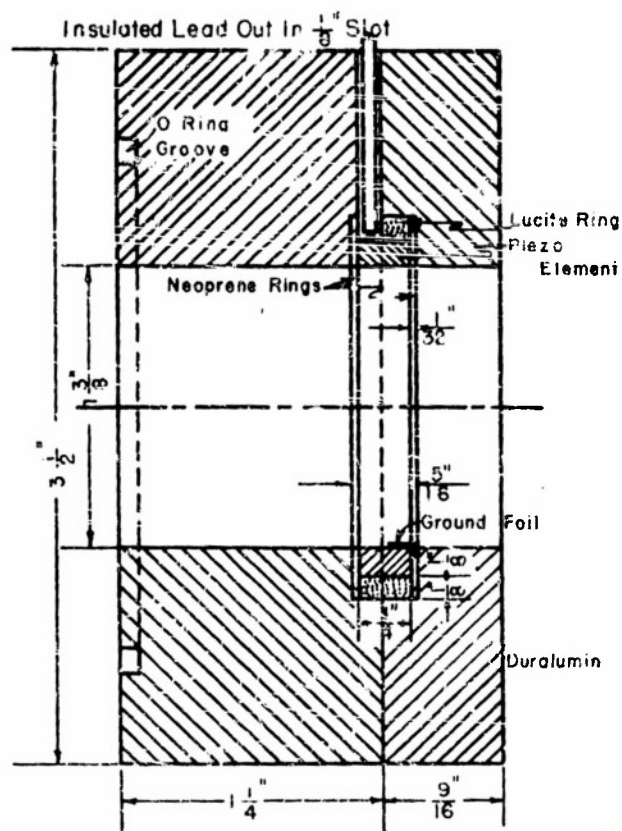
Mount for ring-type piezoelectric element. "O" rings form gas seals where the mount is bolted between flanges of the shock tube. $\frac{1}{8}$ -in. diameter hardened steel pins are used at all joints for alignment. The inner electrode is grounded with 0.003-inch gold foil soldered to silver plating and pressed between duralumin mount and rubber seal.
